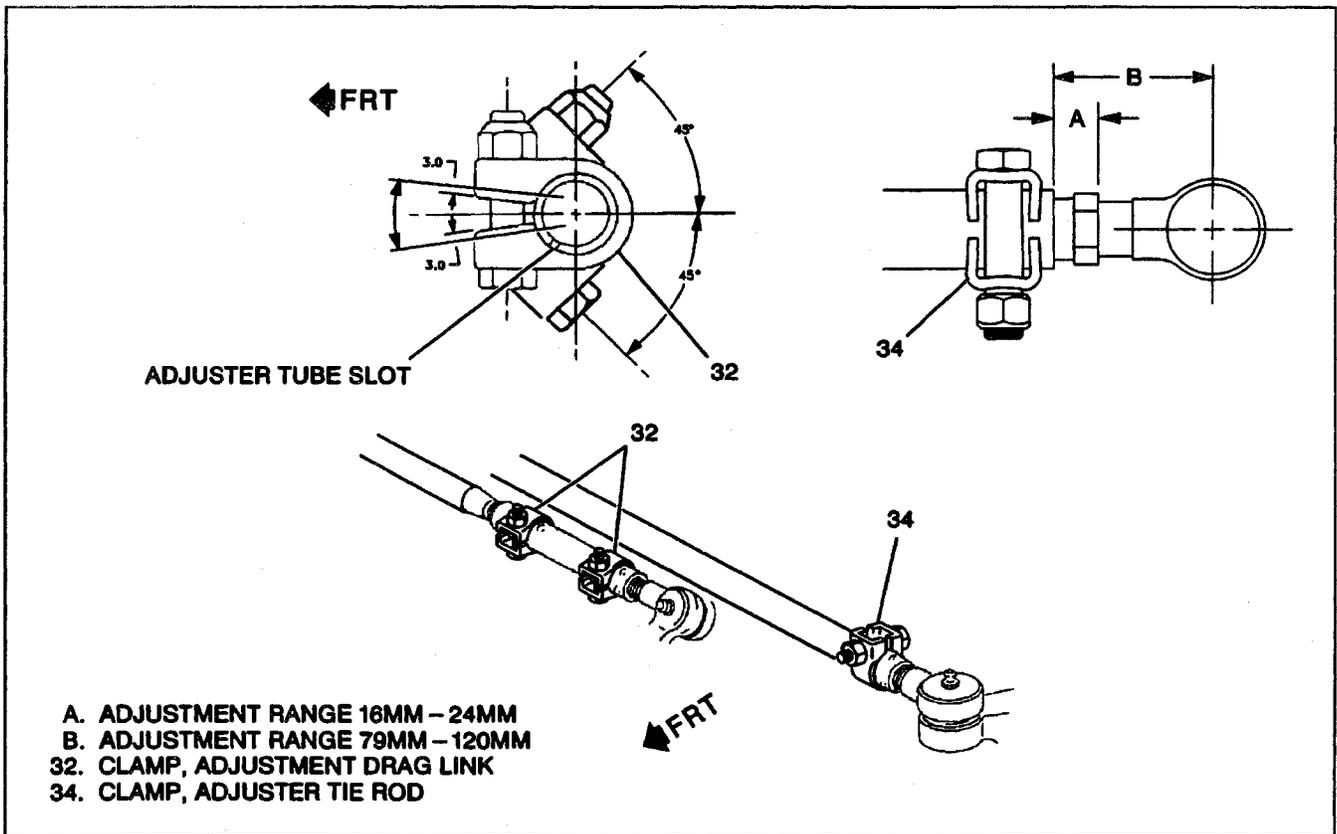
Tie Rod Clamp and Adjuster Tube Positioning - I-Beam Front Axle Models (C 3500HD Models)
